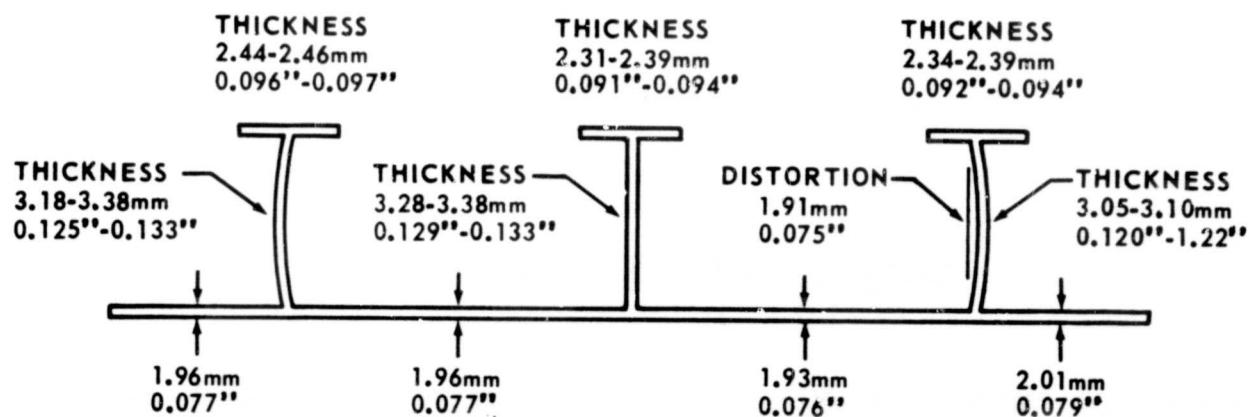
CROSS SECTION OF TITANIUM PART SHOWING THICKNESS AND DISTORTION DIMENSIONS
